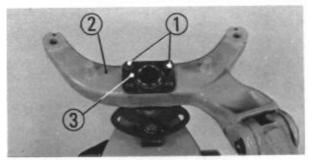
① 6 mm bolts ③ Swivel shaft ② Mount frame
